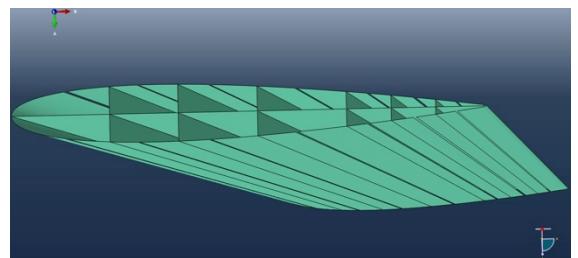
Elastomeric strip bridged generalized modified star-beam airfoil section.
